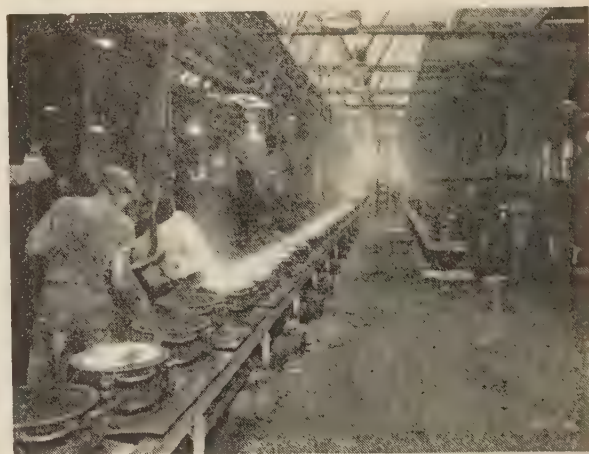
ROLLER CONVEYER USED FOR FLASK RETURN
